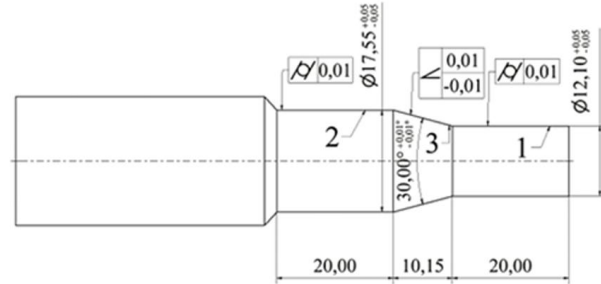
Shape, dimensions and accuracy parameters of the machined part .
